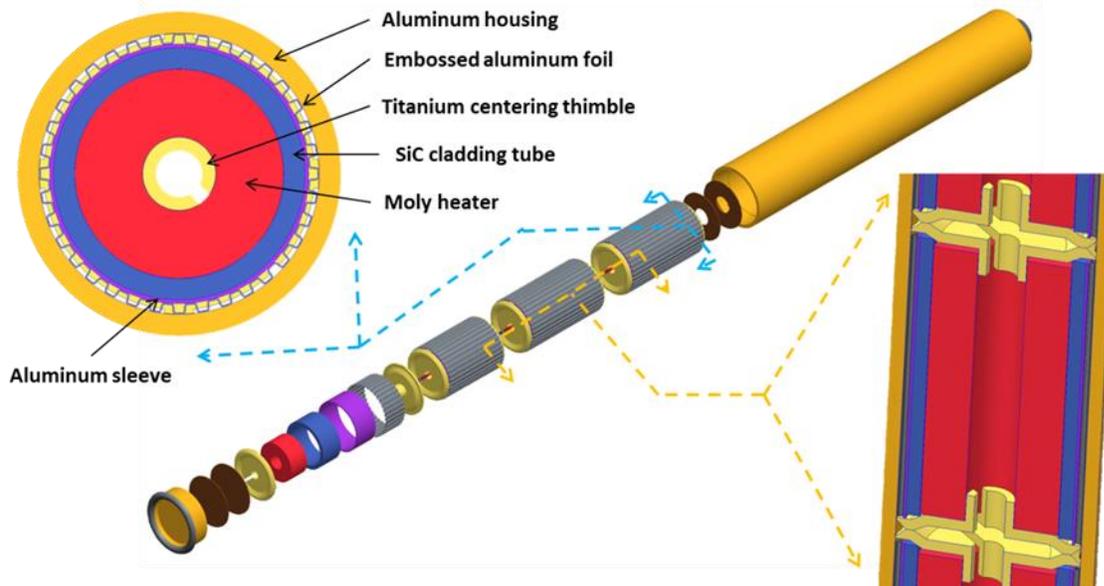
The design concept for the SiC clad tube with an internal moly heater
